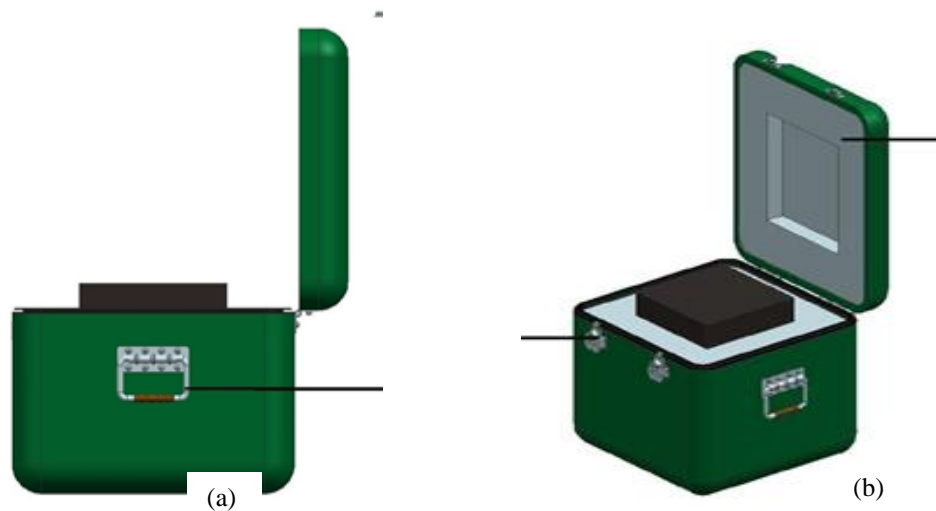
3D drawings of small packaging case (a) front view (b) side view
